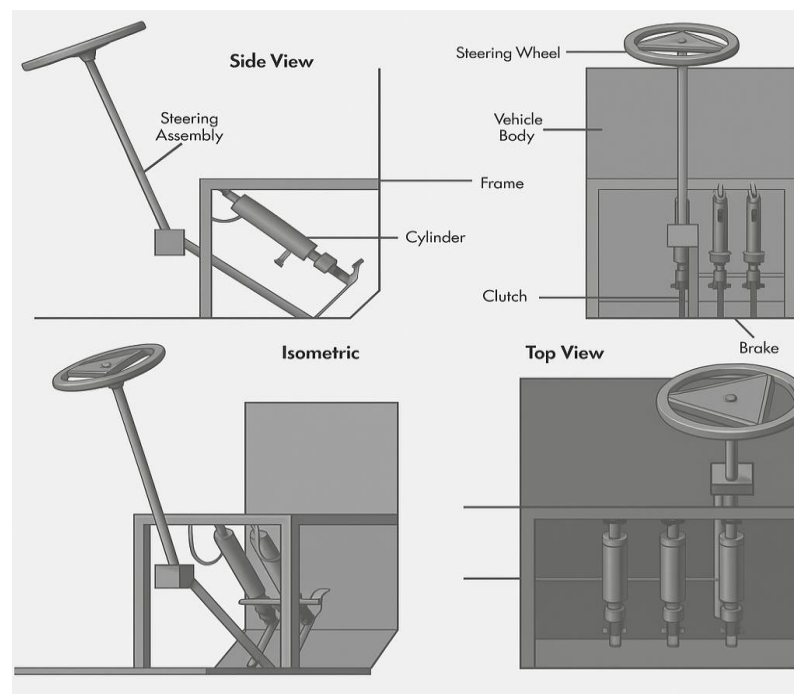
Cad drawing accelerator, brake and clutch respectively [26].
